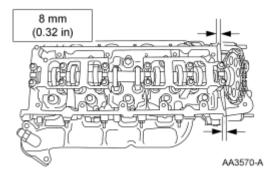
Applying Sealant At Engine Front Cover/Cylinder Head Surface
